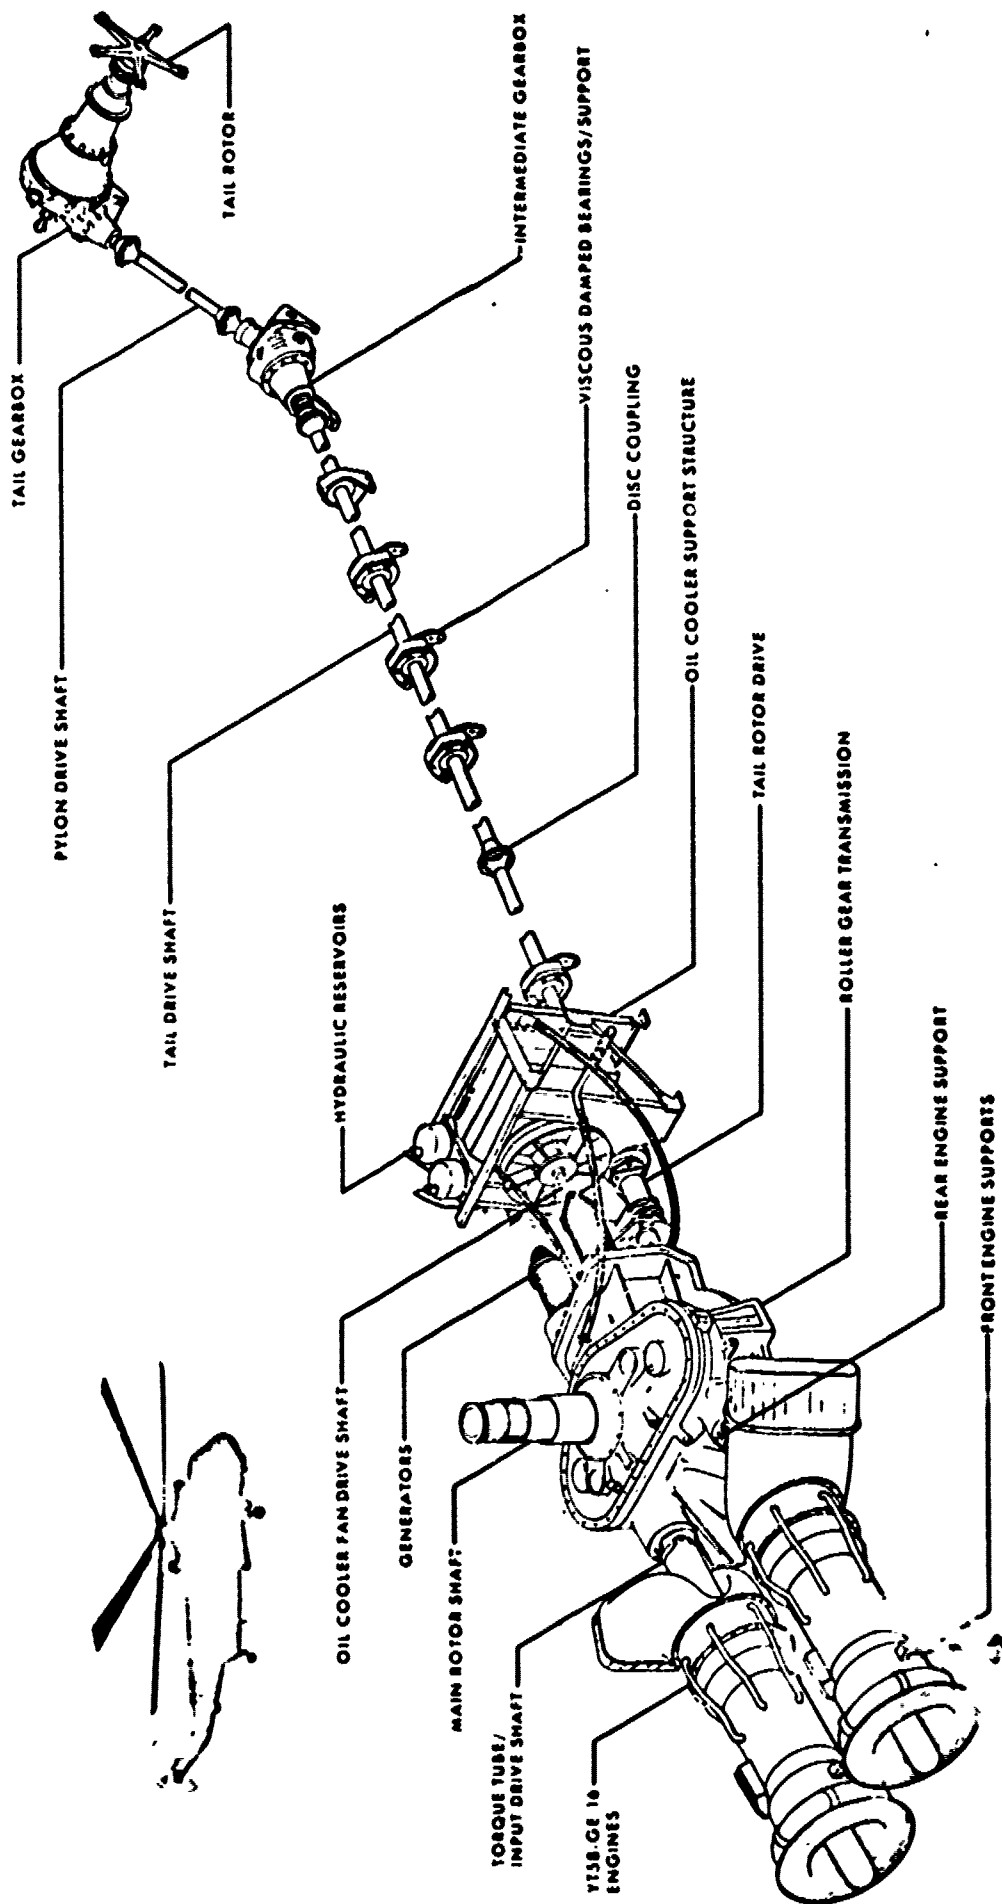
Tail Rotor Drive System, Roller Gear Aircraft
